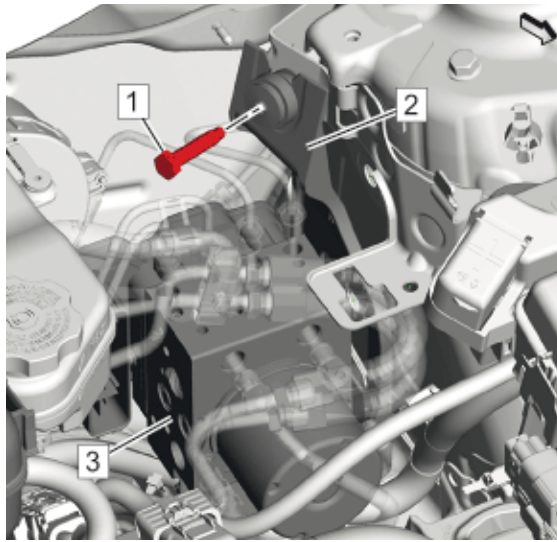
Brake Pressure Modulator Valve, Bracket And Bolt
